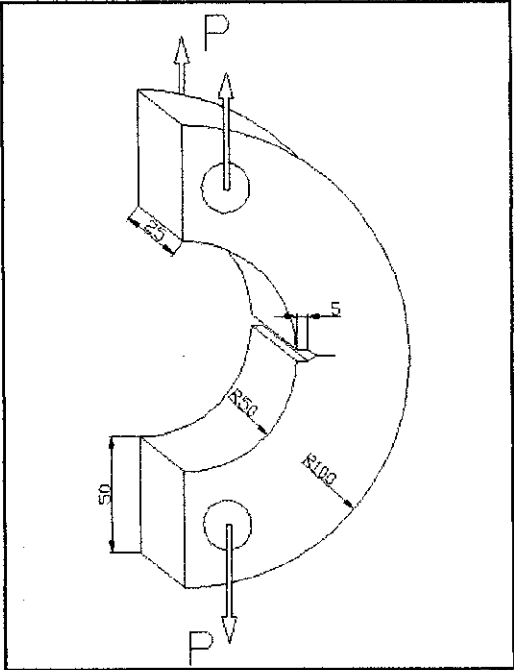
Drawing of Arc-shaped Tension model using AutoCAD.
